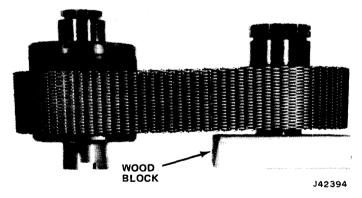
Drive Chain Positioned Around Differential and Drive Sprocket
